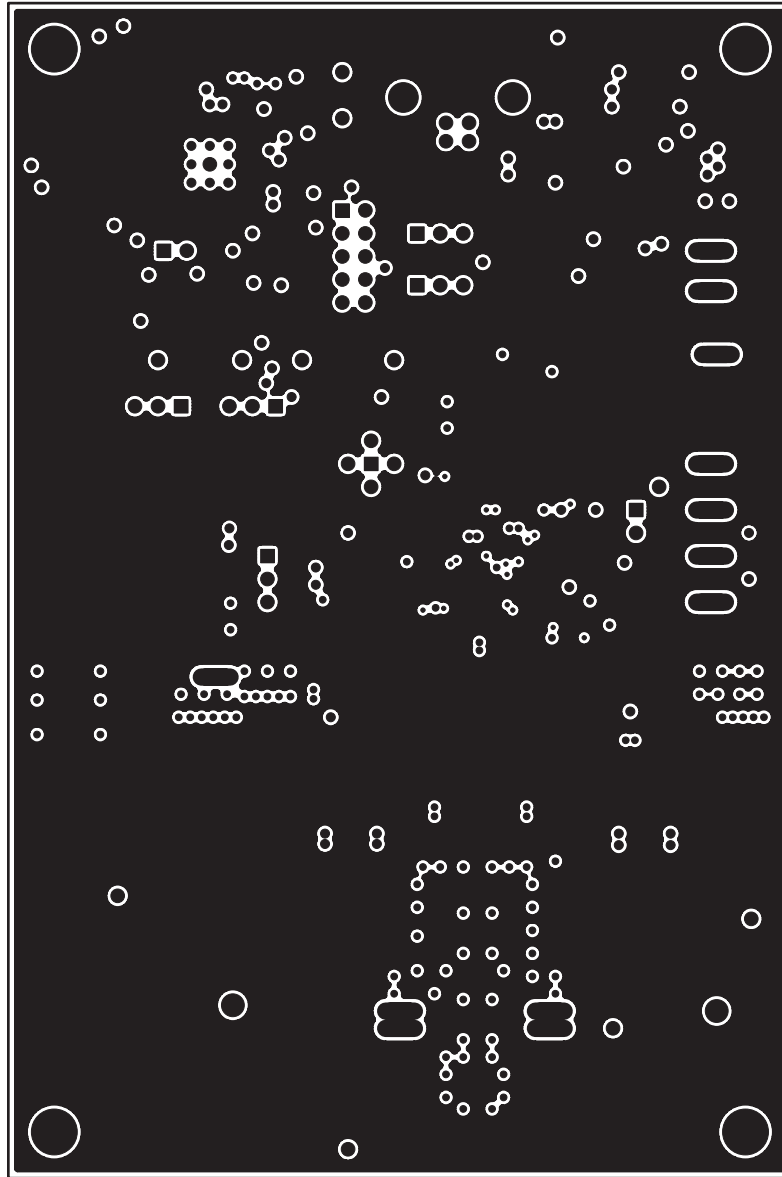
MAX17480 EV Kit PCB Layout—Internal Layer 2
